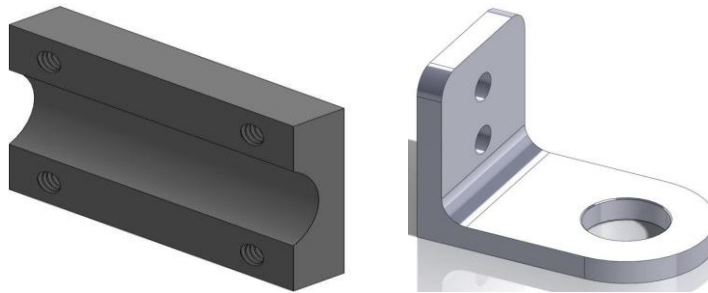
Left) Mounting for the sensor, Right) Clamp for pneumatic actuator
